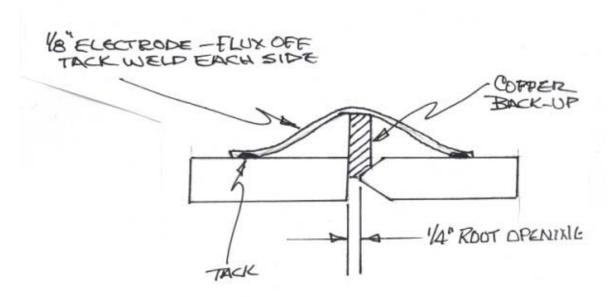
K-Type Joint Welding Qualification Plate [2]
